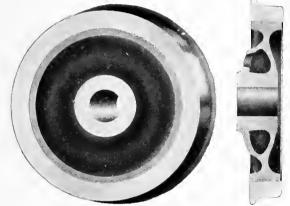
Cast Steel Plate Center, Held by Shrinkage, Mansell Retaining Rings and Bolts. (536)
